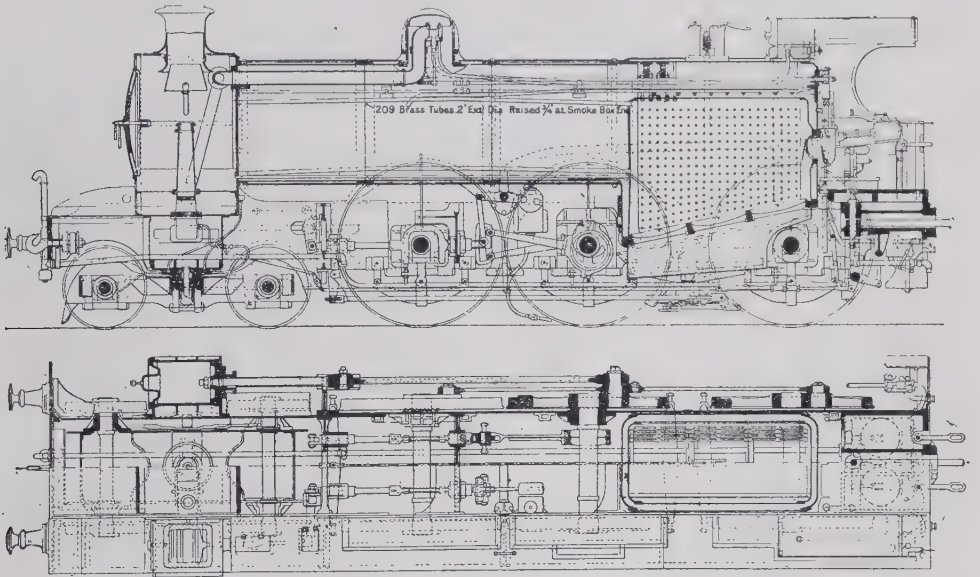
Six-wheeled coupled bogie Express Locomotive (N.B.R.)—
